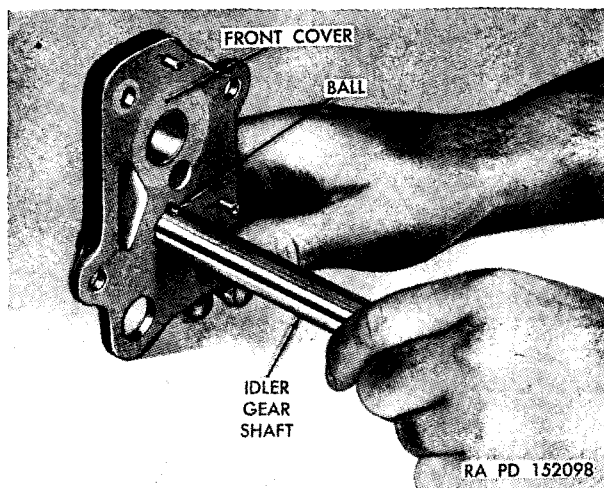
Installing input scavenge and converter circulating pump idler shaft.
